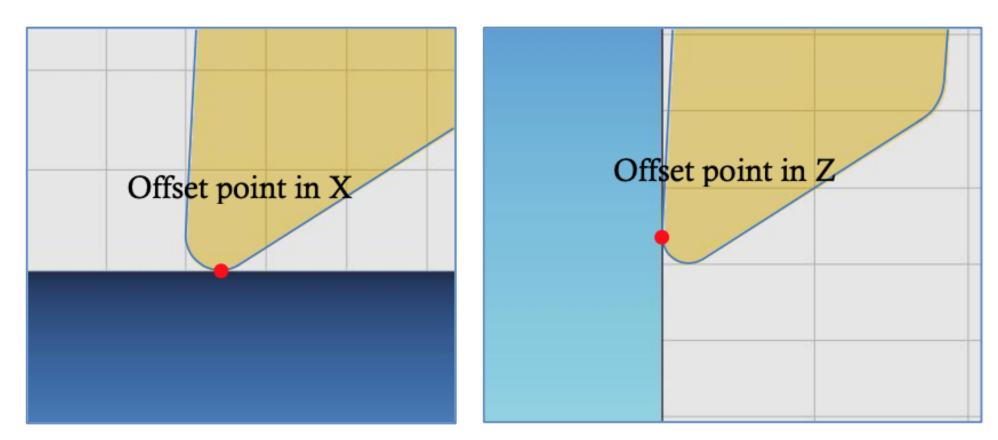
Offset points on the X-axis and Z-axis with tool radius
